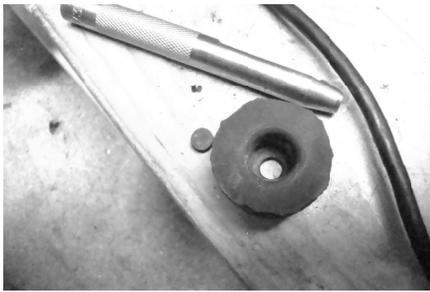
Use a 5/16" hole punch to cut a hole in the rubber plug. Insert plug over Hall cable, being careful not to damage the terminal connector ends. *The narrow diameter end of the rubber plug faces the ICU prong terminal ends.
